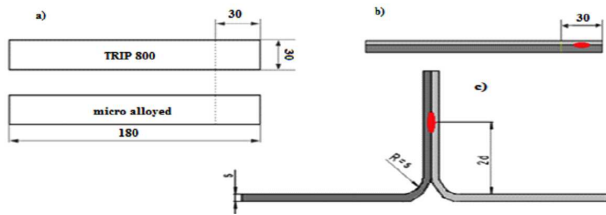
The dimensions of the (a) materials of specimens (b) welding specimens for tensile-peel test, (c) the tensile-peel specimens.
